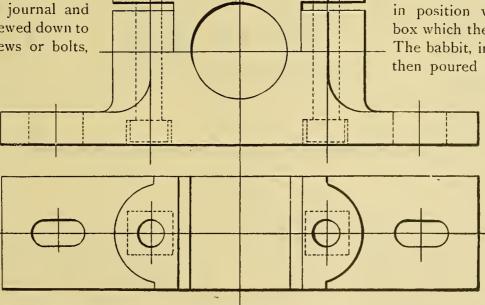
shows the front view of a complete pillow-block with cap and bolts. Fig. 400 is a top view of base with the cap removed. The seats in the journal-box are usually babbited, that is, lined
